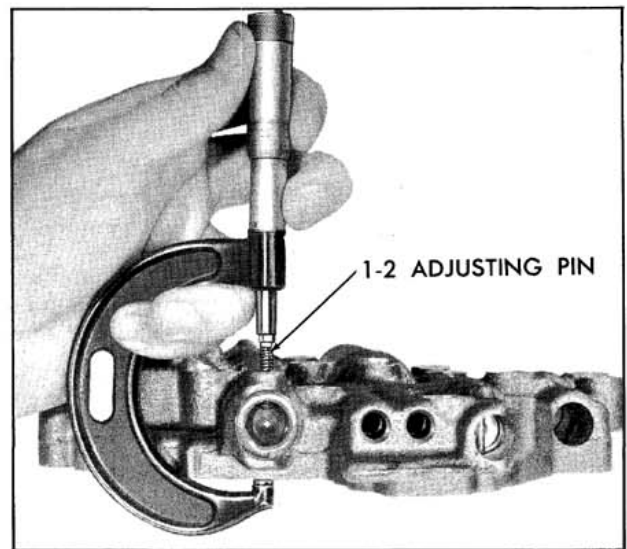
Checking Accumulator Valve Adjusting Pin
